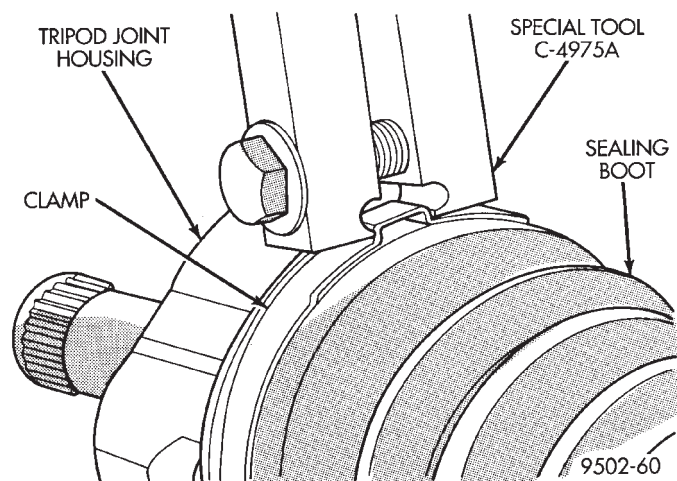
Crimping Tool Installed on Sealing Boot Clamp
